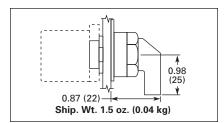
E22 Series 2-Position — 45° Throw — Lever
